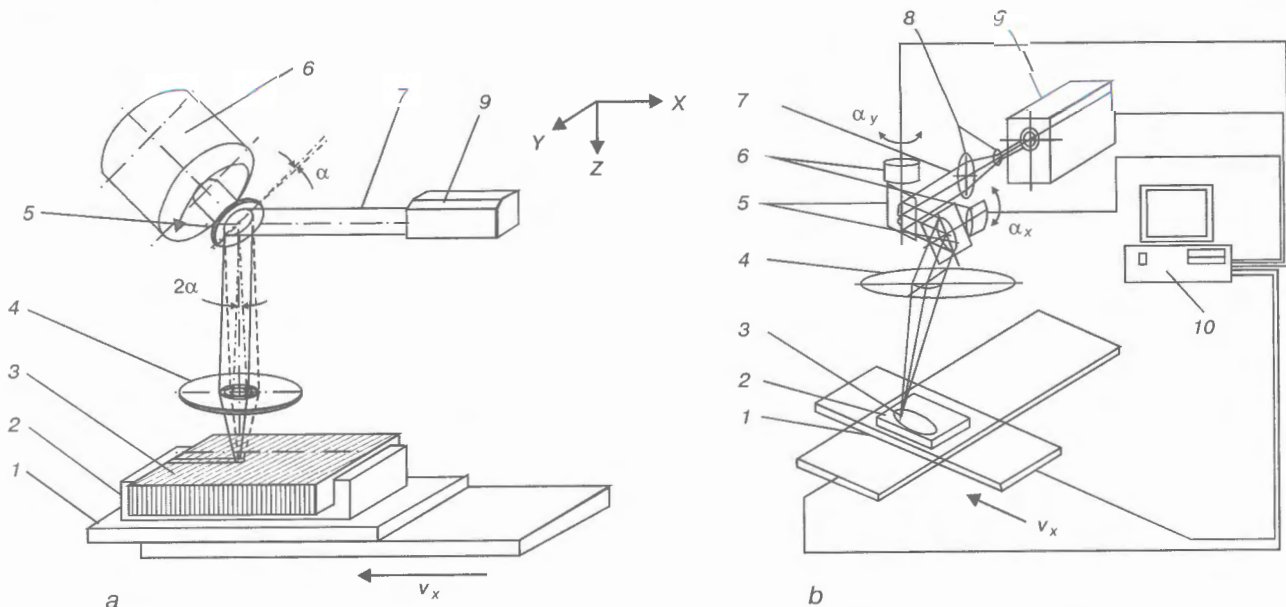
Schematics of experimental set up for studying the process of welding (a) and semiconductors cutting (b): 1 — worktable; 2 — fixture; 3 — sample; 4 — focusing lens; 5 — rotating mirror; 6 — drive; 7 — laser beam; 8 — telescopic system; 9 — source; 10 — PC
